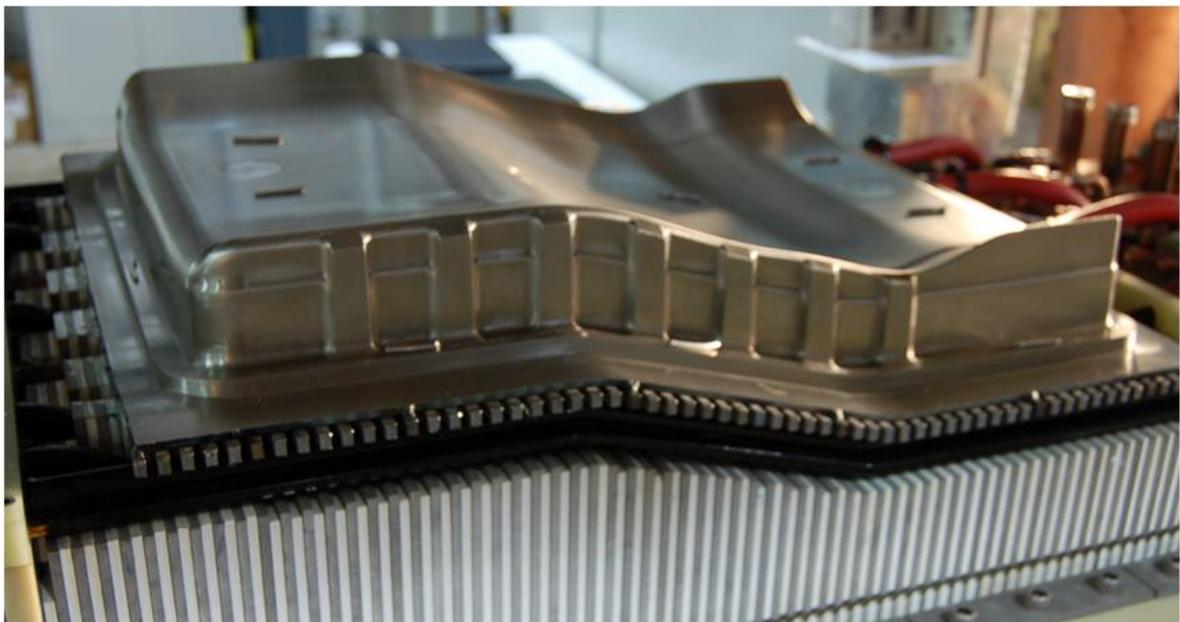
Complete bottom half of the Ford seat pan tool showing the detail of the machined susceptor
